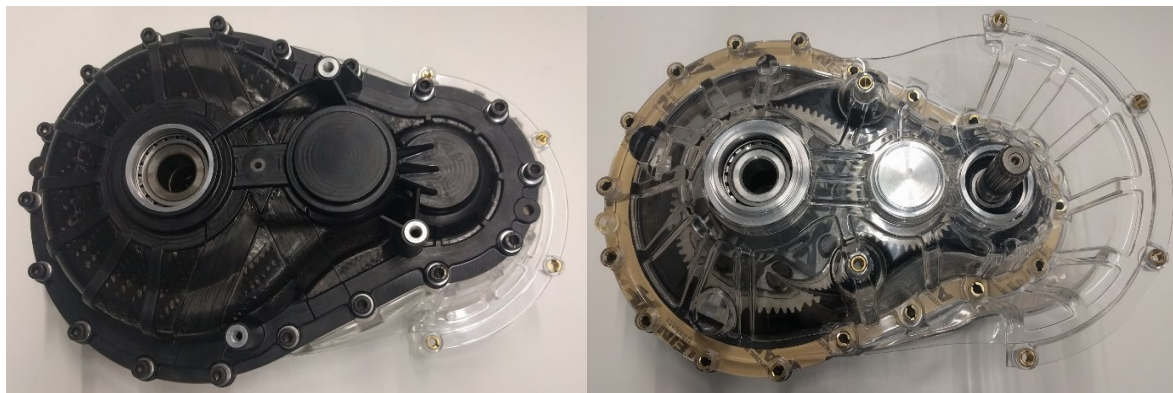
Finished and assembled prototype with PMMA part replacing the second housing part.
